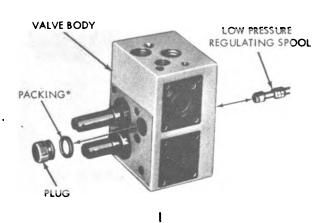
Gunner's hydraulic control valve disassembly or assembly (1 of 2).
